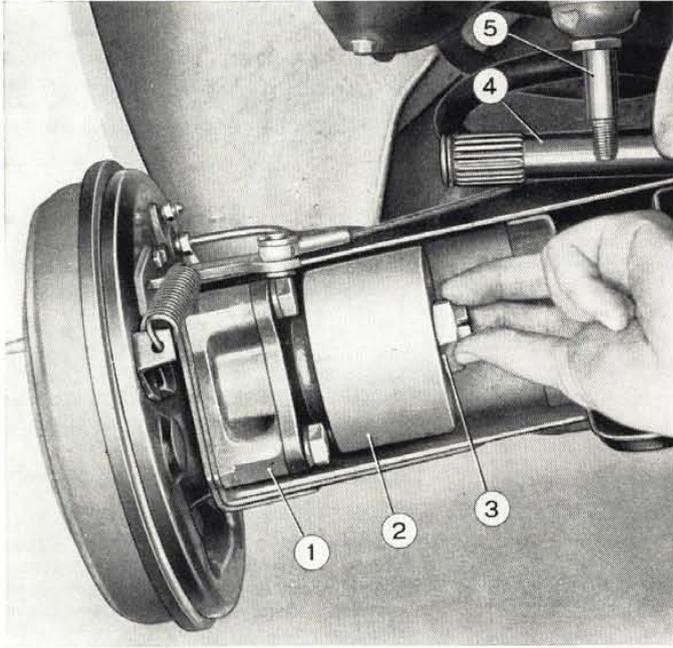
Loosening wheel shaft flexible joint mounting nut.
